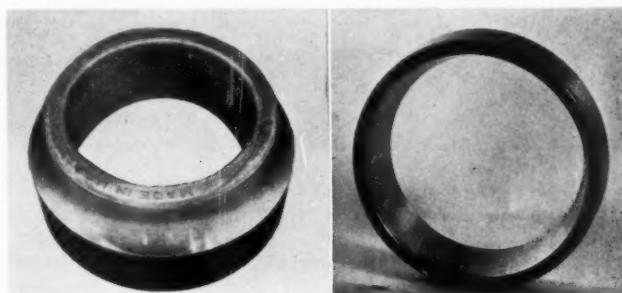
EXAMPLES OF (LEFT) BALL TYPE AND (RIGHT) ROLLER TYPE AUTOMOBILE-WHEEL BEARINGS INDENTED IN SHIPMENT
